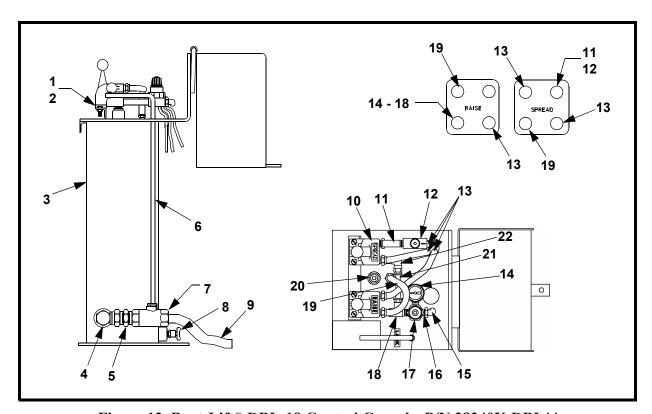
Boot-Lift® DBL-18 Control Console, P/N 38340X-DBL
